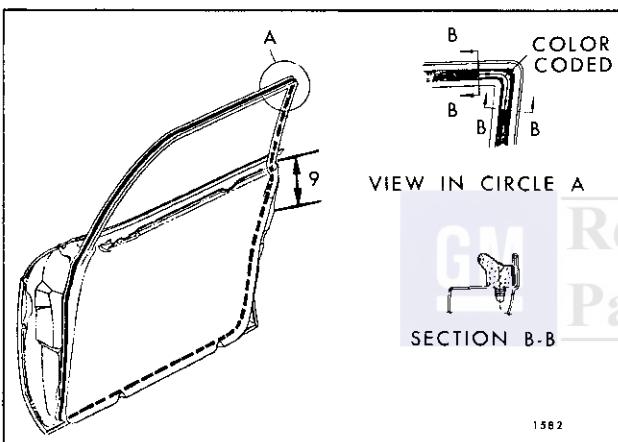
Front Door Weatherstrip — "B" Closed Styles
